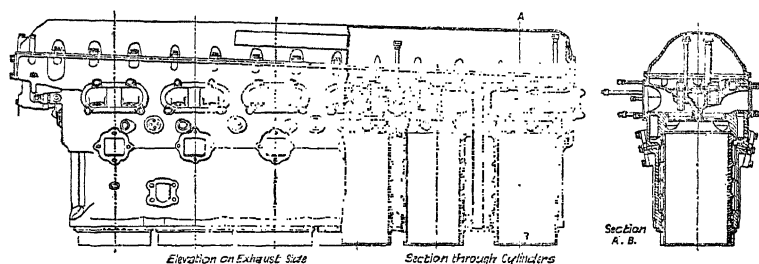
Cylinder block of Rolls Royce "Merlin" engine. (*Machinery*.)
